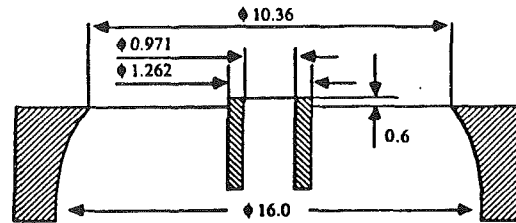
Nozzle exit geometry (dimensions are in mm)
